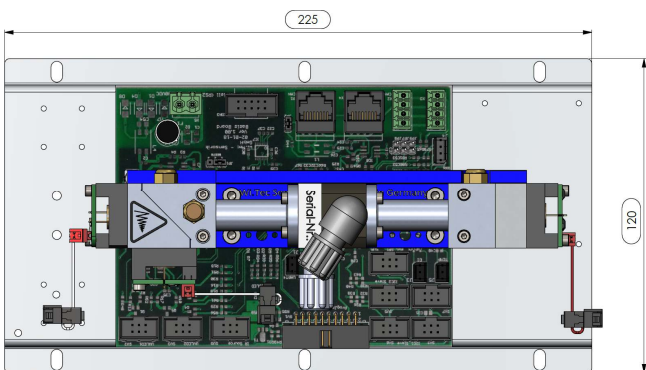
Top view of the entire photometer assembly with a 25mm process gas sample cell (AK25), with evaluation electronics and mounting plate for installation
